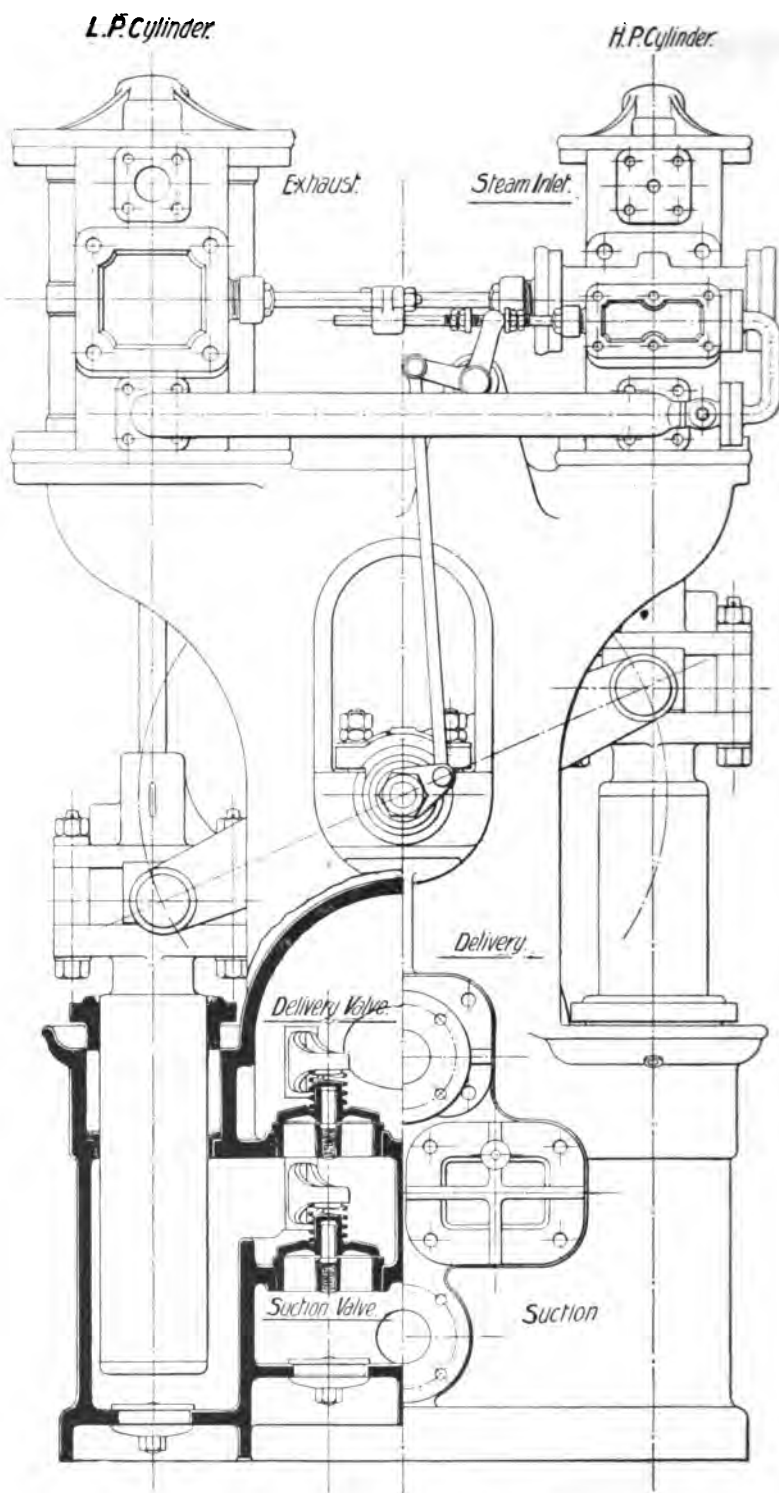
MESSRS. J. EVANS & SONS' BEAM COMPOUND HIGH-PRESSURE BOILER FEED PUMP.
